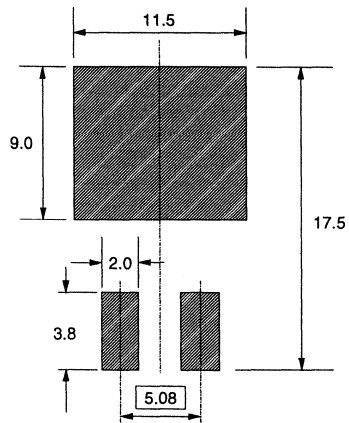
SOT404 : minimum pad sizes for surface mounting.
